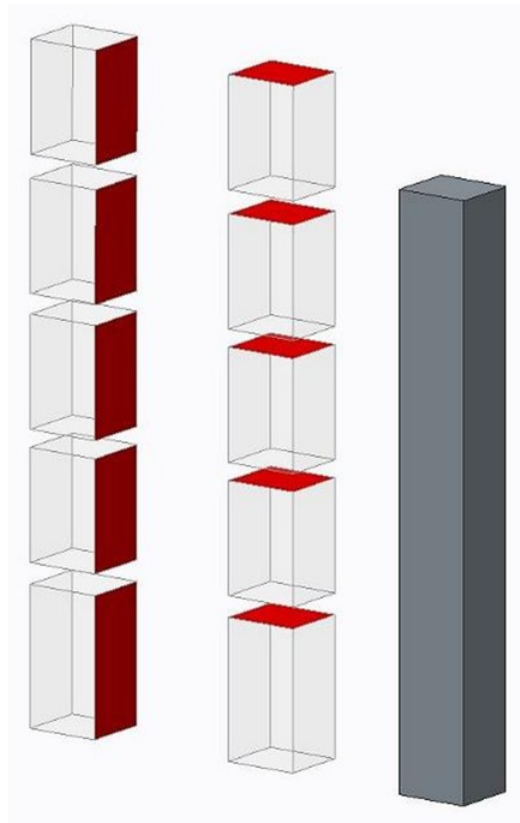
Exploded CAD diagram of the 3D printed part with highlighted cross sections
